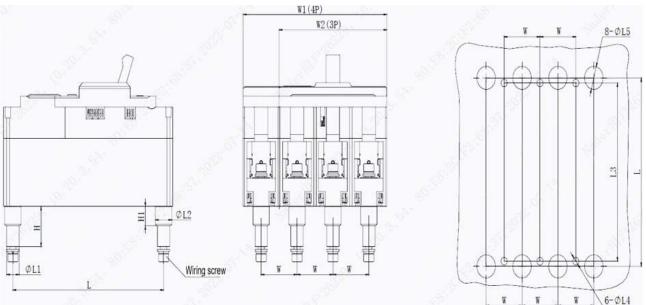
3P, 4P outline dimension drawing of rear wiring board Table 18 The installation dimensions of wiring products behind the board are shown in the table below (unit:mm)
